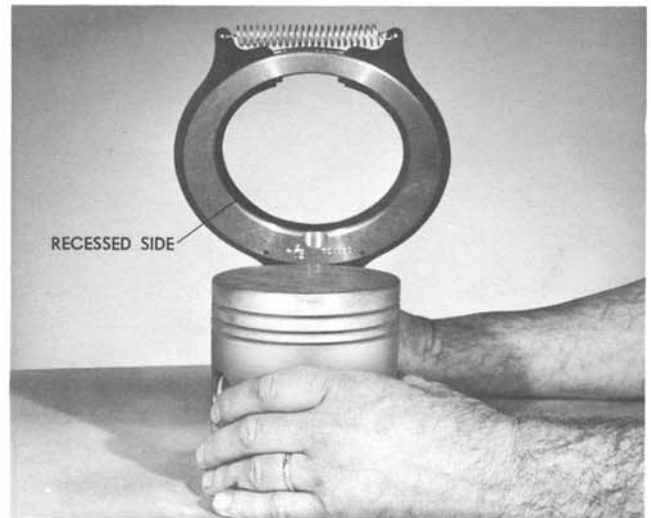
INSTALLING RINGS WITH RING EXPANDER
